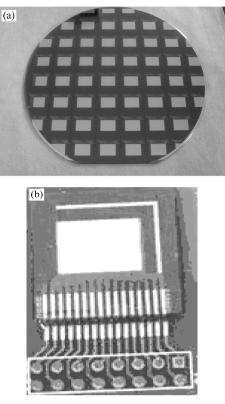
(a) Wafer of the OLEDoS driving circuit; (b) PCB package of the OLEDos driving circuit.
